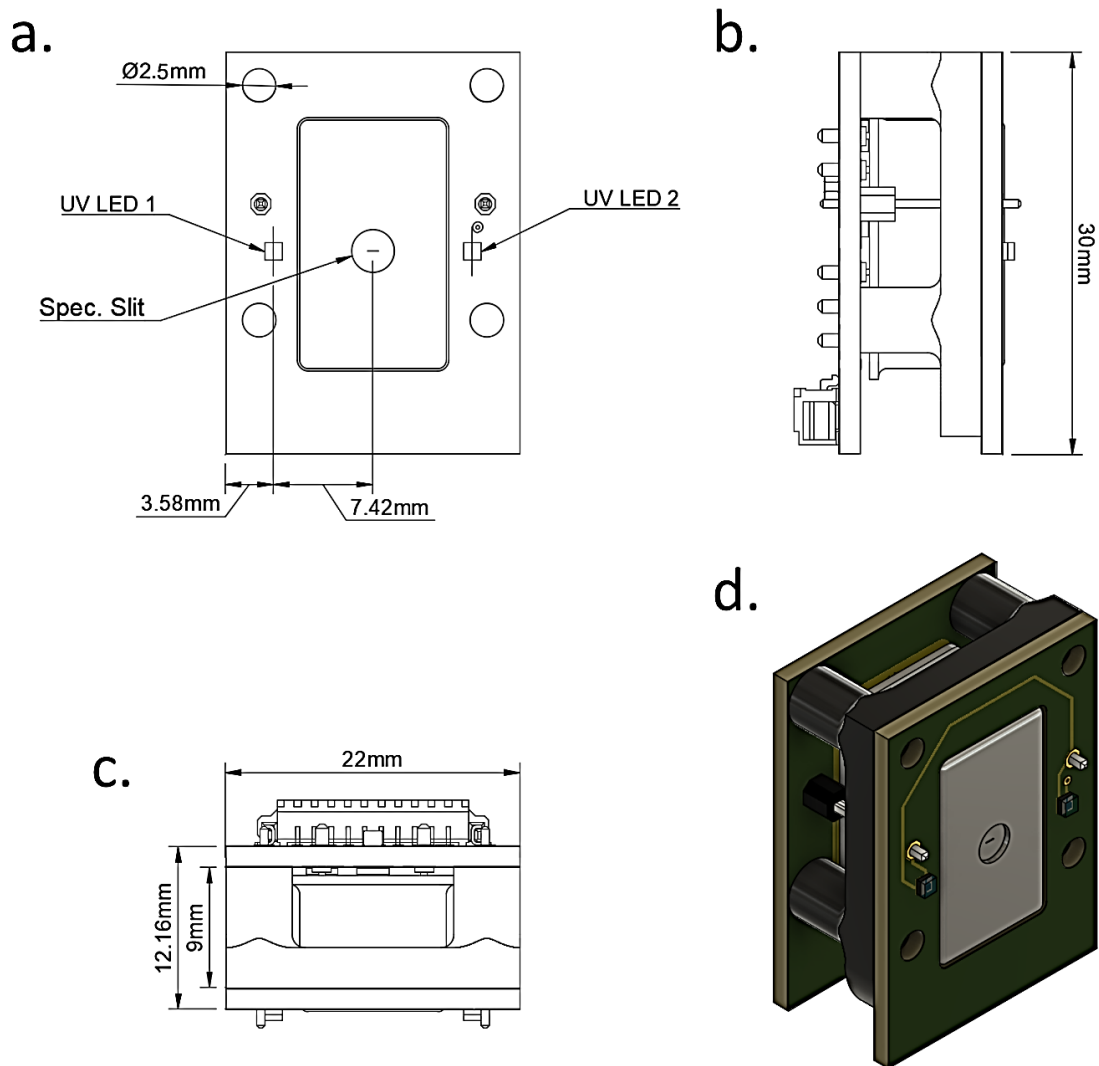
C12880MA spectrometer mounting board and stacked ultraviolet (UV) LED board design. (a) Dimensioned top view of board stack with LEDs and spectrometer slit labelled. (b) Dimensioned side view of stacked boards. (c) Dimensioned front view of stacked boards. (d) 3D CAD render of stacked boards assembly.
